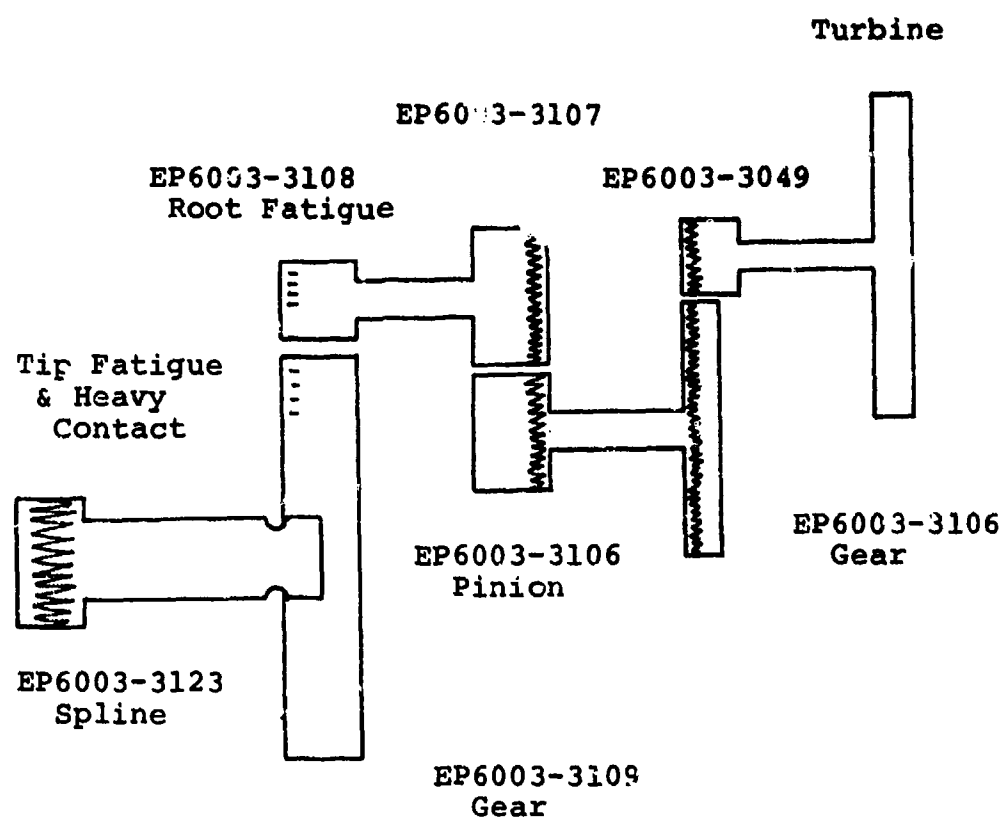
SCRM S/N 2 Gearbox and Geartrain.
